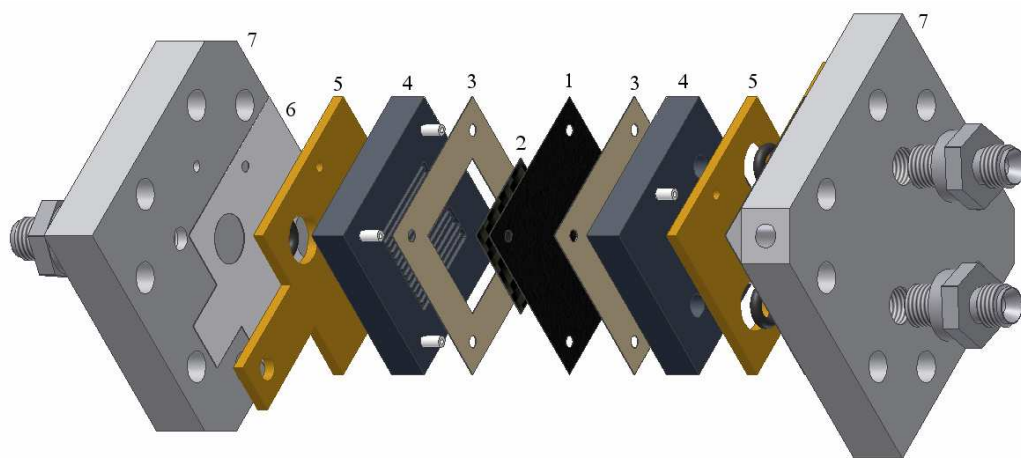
An exploded view of a unit cell. 1) MEA 2) PTL 3) Gasket 4) Flow field plates 5) Current collectors 6) Insulator 7) End plate. Clamping bolts are omitted from the figure.
